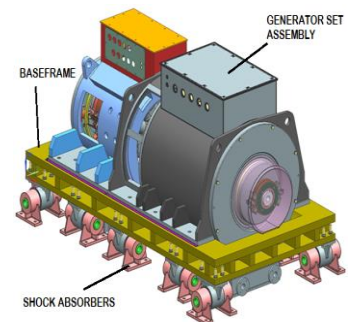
3D model of Generator Set Assembly (UG-NX-10.0)
